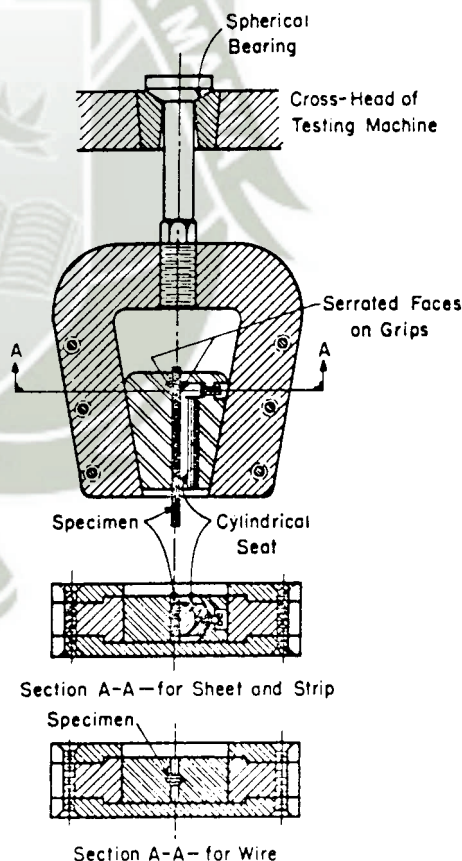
Gripping Devices for Sheet and Wire Specimens
